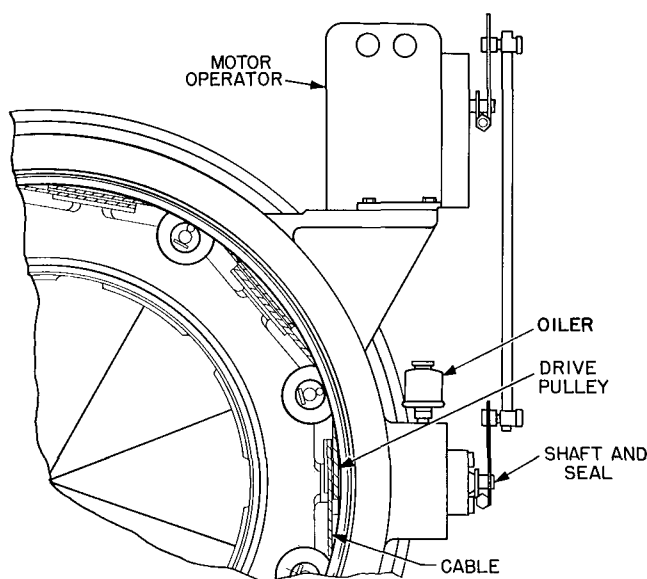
Guide Vane Motor and Seal Assembly
